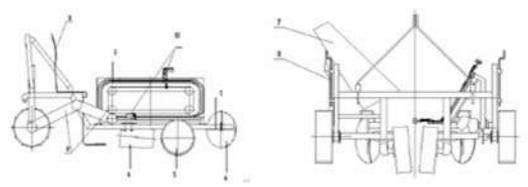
Parts of automatic planting equipment [10] a) lateral view; b) back view
